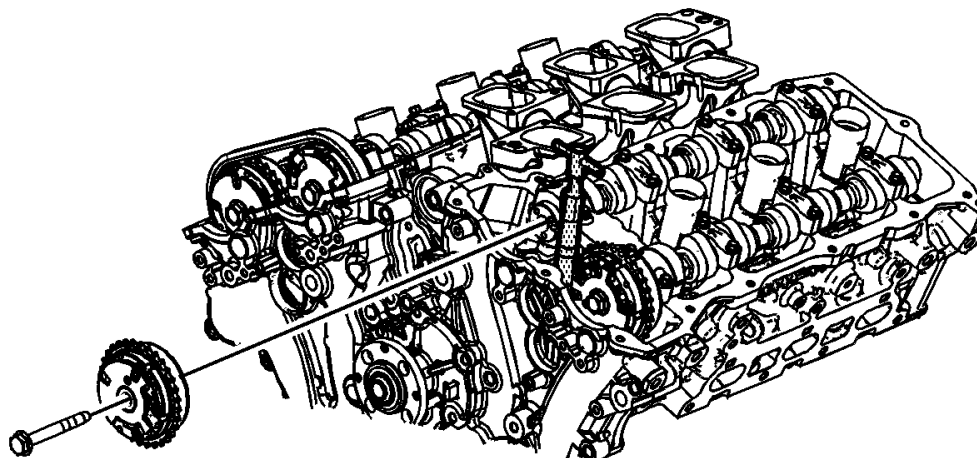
View Of Exhaust Camshaft Position Actuator Bolt
